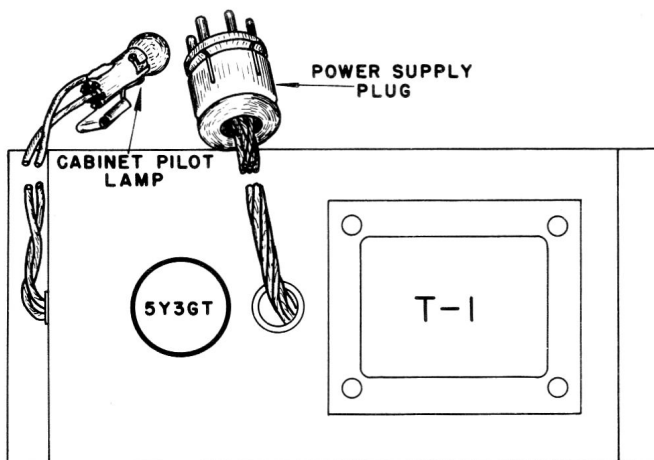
POWER SUPPLY CHASSIS LAYOUT
